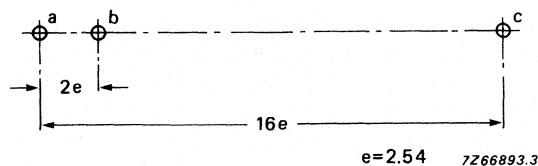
Hole pattern in printed-wiring board (viewed on component side).
